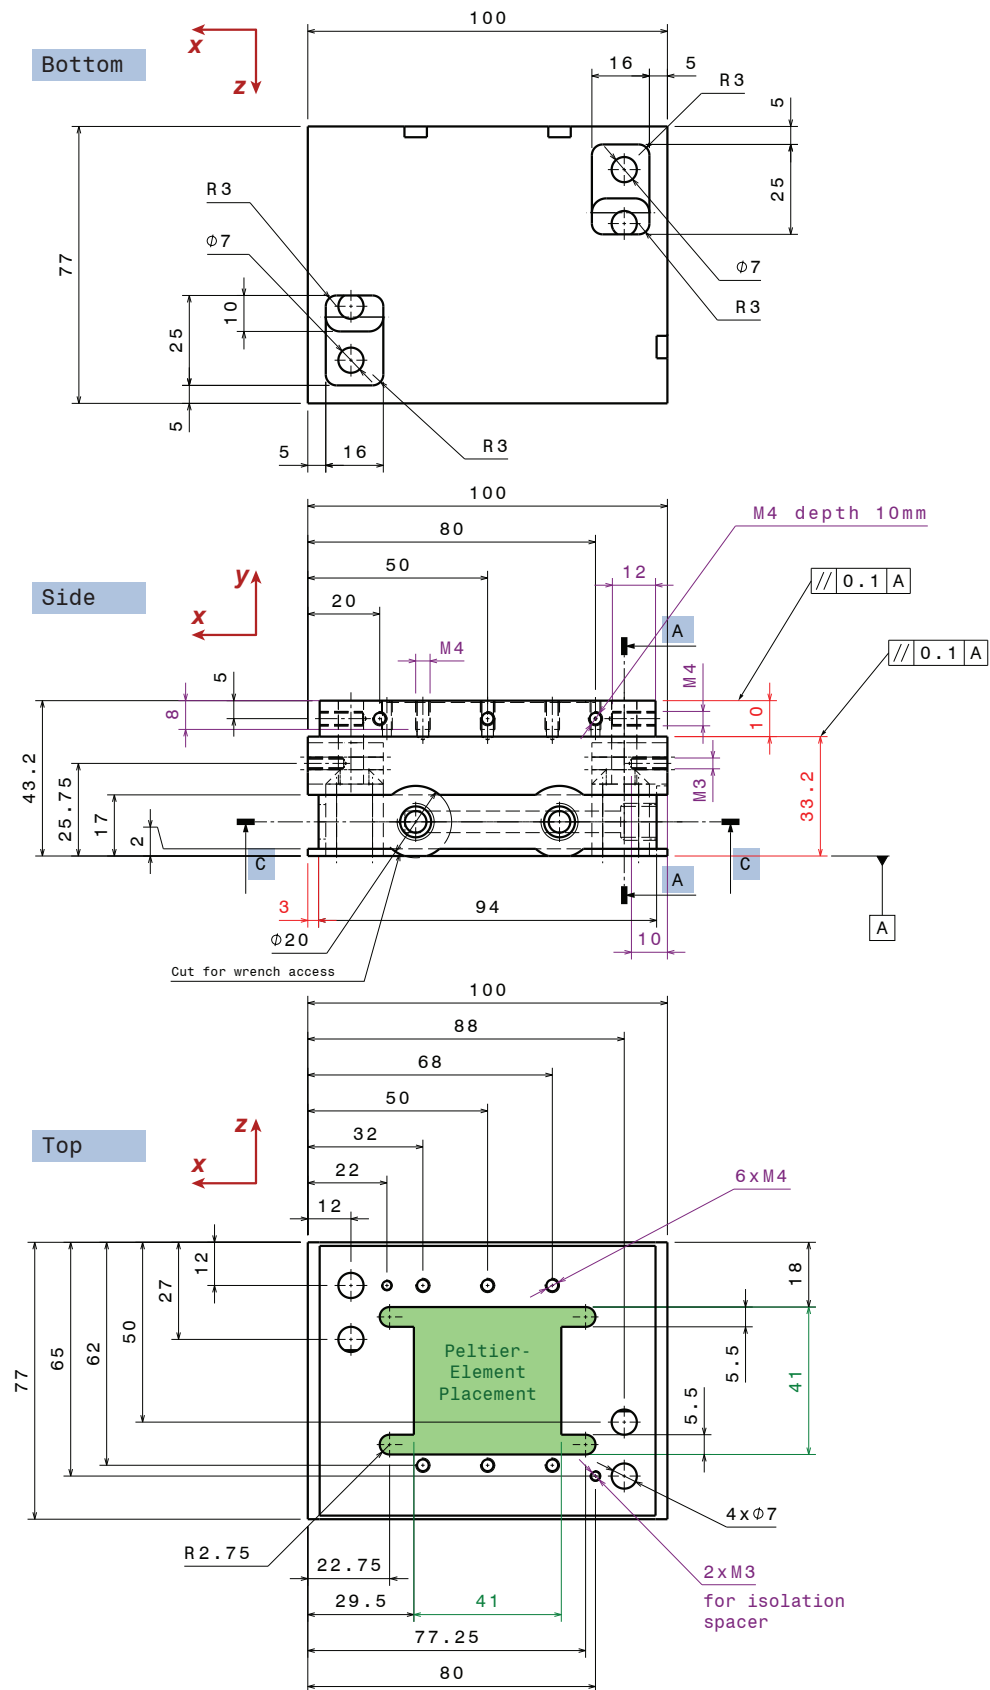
TA support: base unit CAD part 1/3 – main views. (Material: Duralumin)
